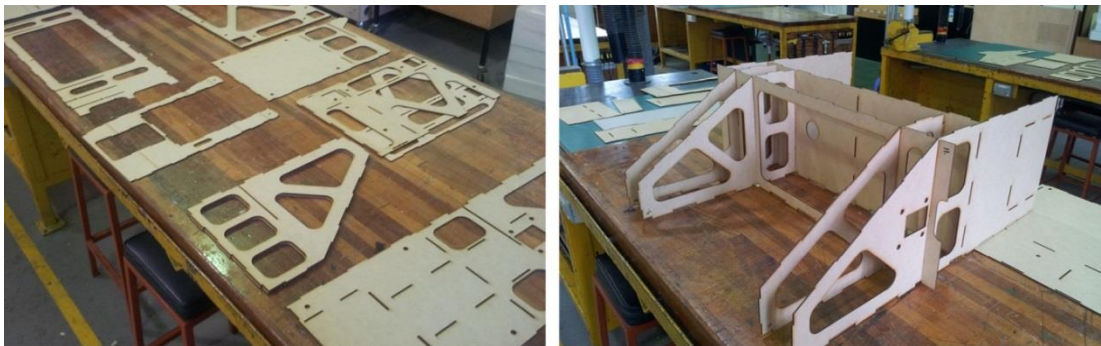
The left image shows the individual laser cut components laid out prior to assembly and the right image shows the assembly of the bulkhead panels prior to attaching the skin panels.
